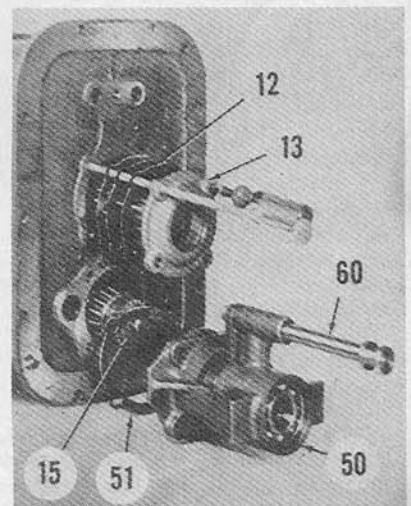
Rear face of TO transmission housing showing shims (12) for adjusting the main shaft bearings and shims (51) for adjusting the countershaft bearings.
